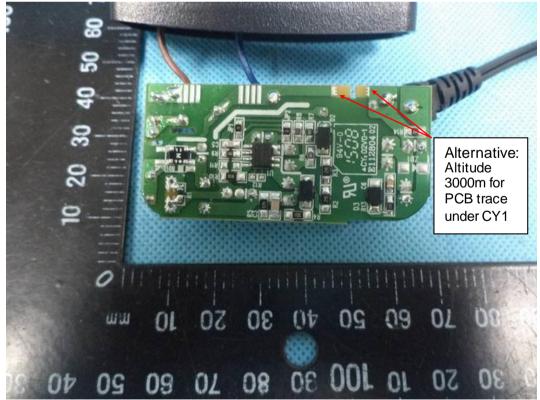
GT-86060-WWVV-W2E (PCB layout REV:103 for Altitude 3000m)
